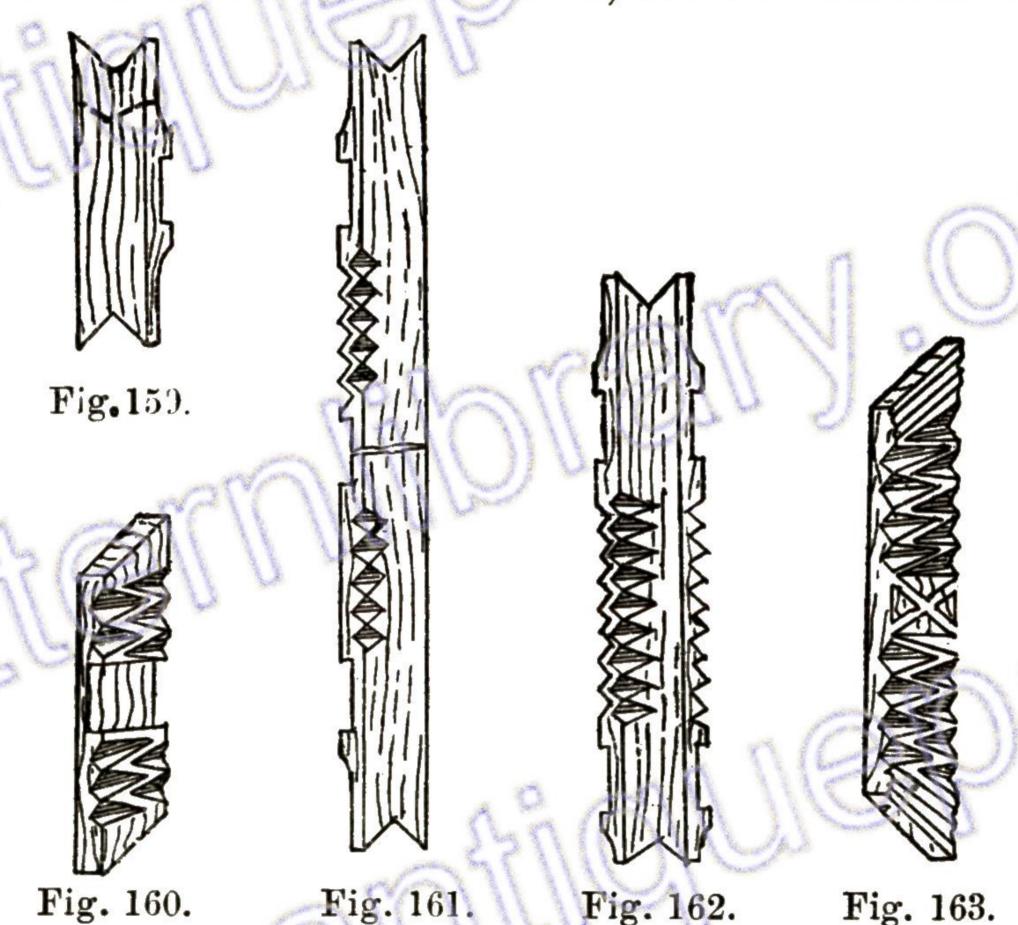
Short Length for Cross-pieces; Fig. 160.—Piece to Form Cross; Fig. 161.—Cross-piece; Fig. 162.—Centre and Side Piece; Fig. 163.—Strip for Recess.
